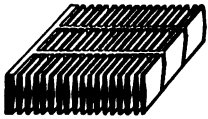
Tudor positive and section. FIG. 12.—Willard "plowed" plate. instance, and by "spinning" with rotating circular discs in the latter. A section of the latter plate is shown in Fig. 14.
